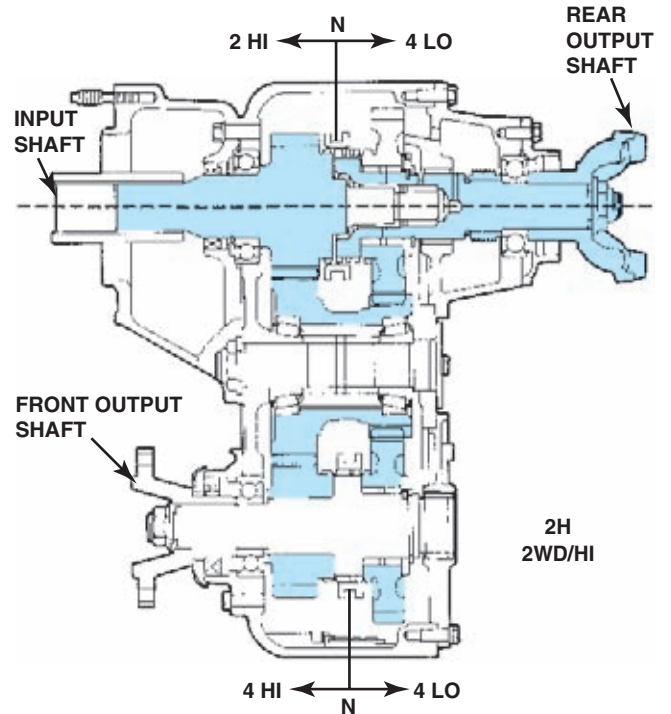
A gear-drive transfer case uses a gear arrangement, as shown here. (Courtesy of DaimlerChrysler Corporation.)
